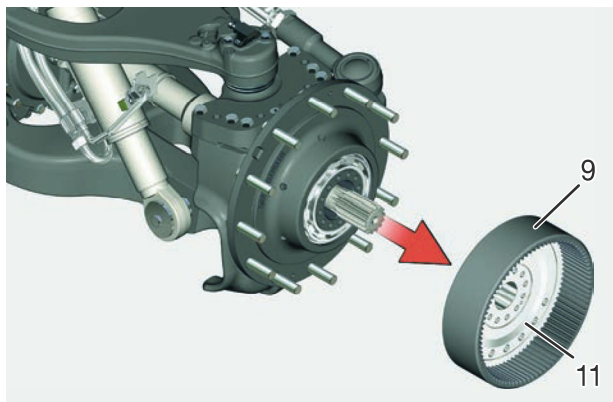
Remove the crown flange (9) assembly. Mark the assembly position of the crown gear carrier flange (11).
